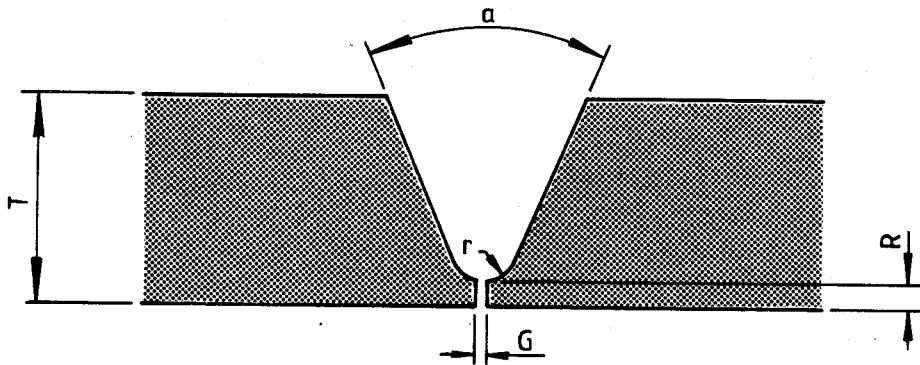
MANUAL WELDING, ONE SIDE IN OVERHEAD POSITION
